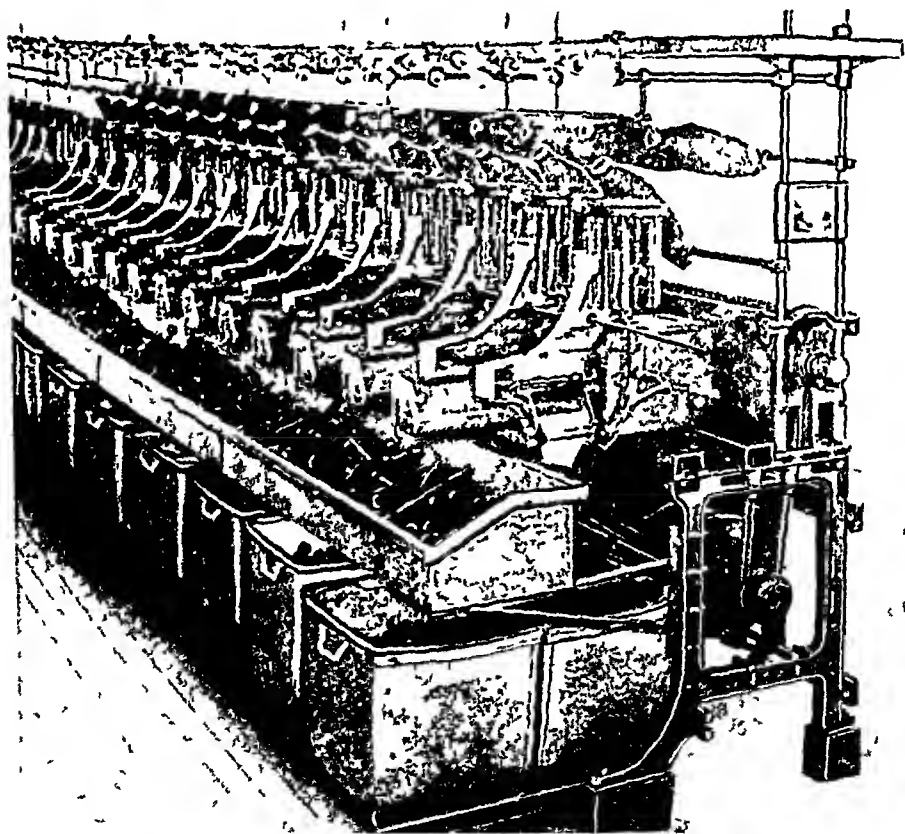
Whitin-Schweiter automatic filling bobbin winder
